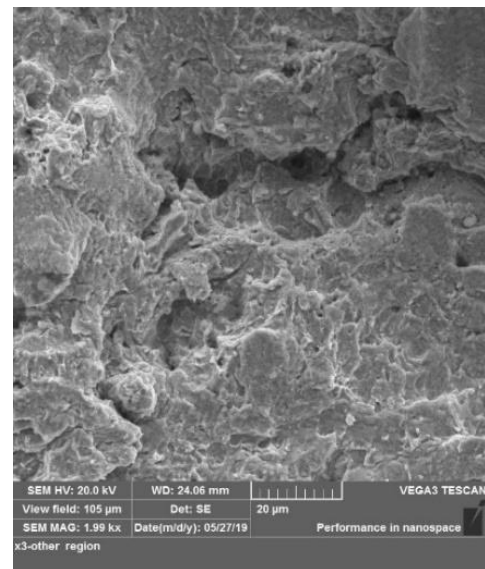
(a) showed the fracture region of ultrasonic peened specimen with applied load (403Mpa). The figure showed the crack beginning from the surface resulted from surface defects. The sudden fracture happened due to the crack propagation marked by the arrow.
